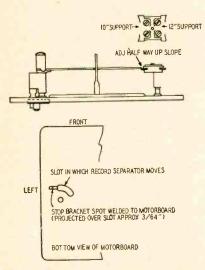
Drawings showing the top of the record support, the front view, and the left-hand underside of the motorboard of the type RP-176 changer.
